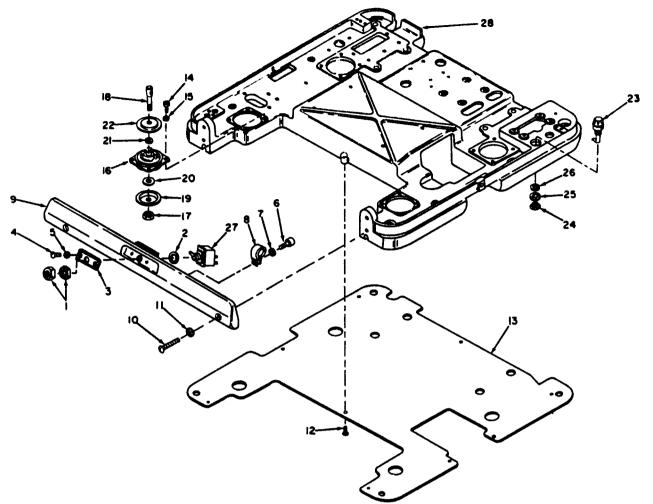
Teletypewriter base and keyboard guard, exploded view (not applicable to TT-259/FG).
